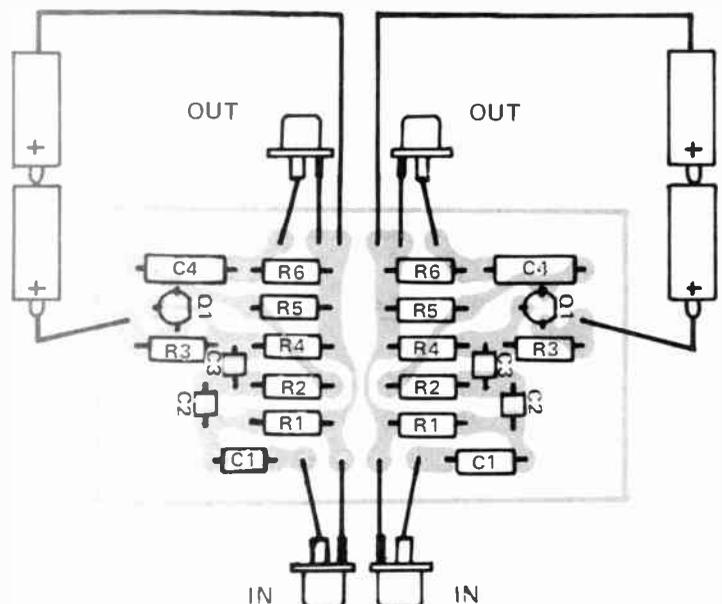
Printed circuit board layout for the rumble filter 40mm x 70mm.
